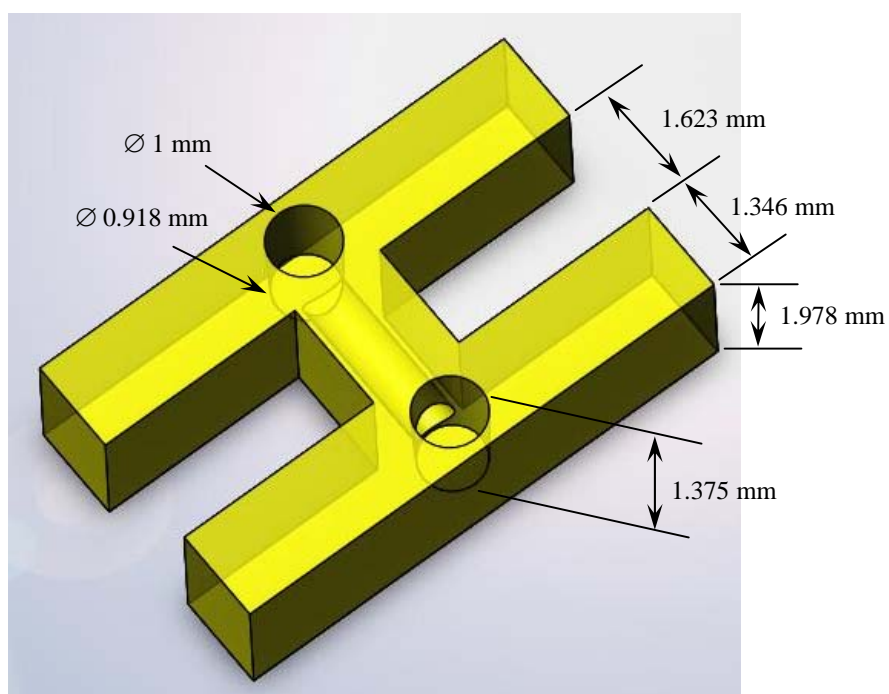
3D view of the H-shaped microchannel insert. The center microchannel is 0.635 mm in diameter. The dimensions of the miniature female luer fitting are the same for every module used in this study.
